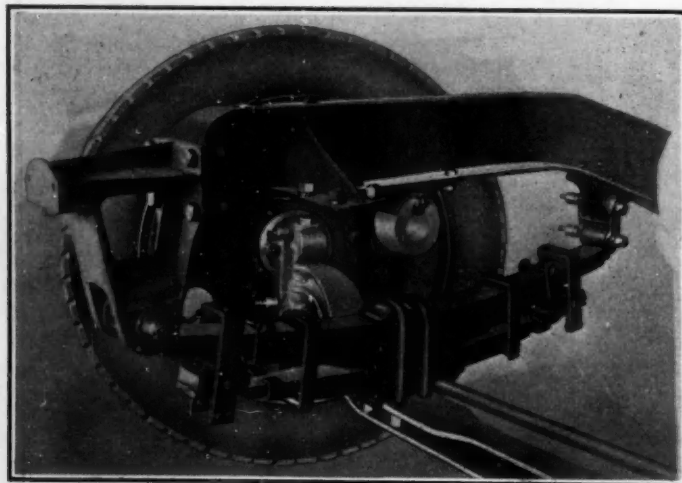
FRONT-AXLE, SPRING AND WHEEL ASSEMBLY
